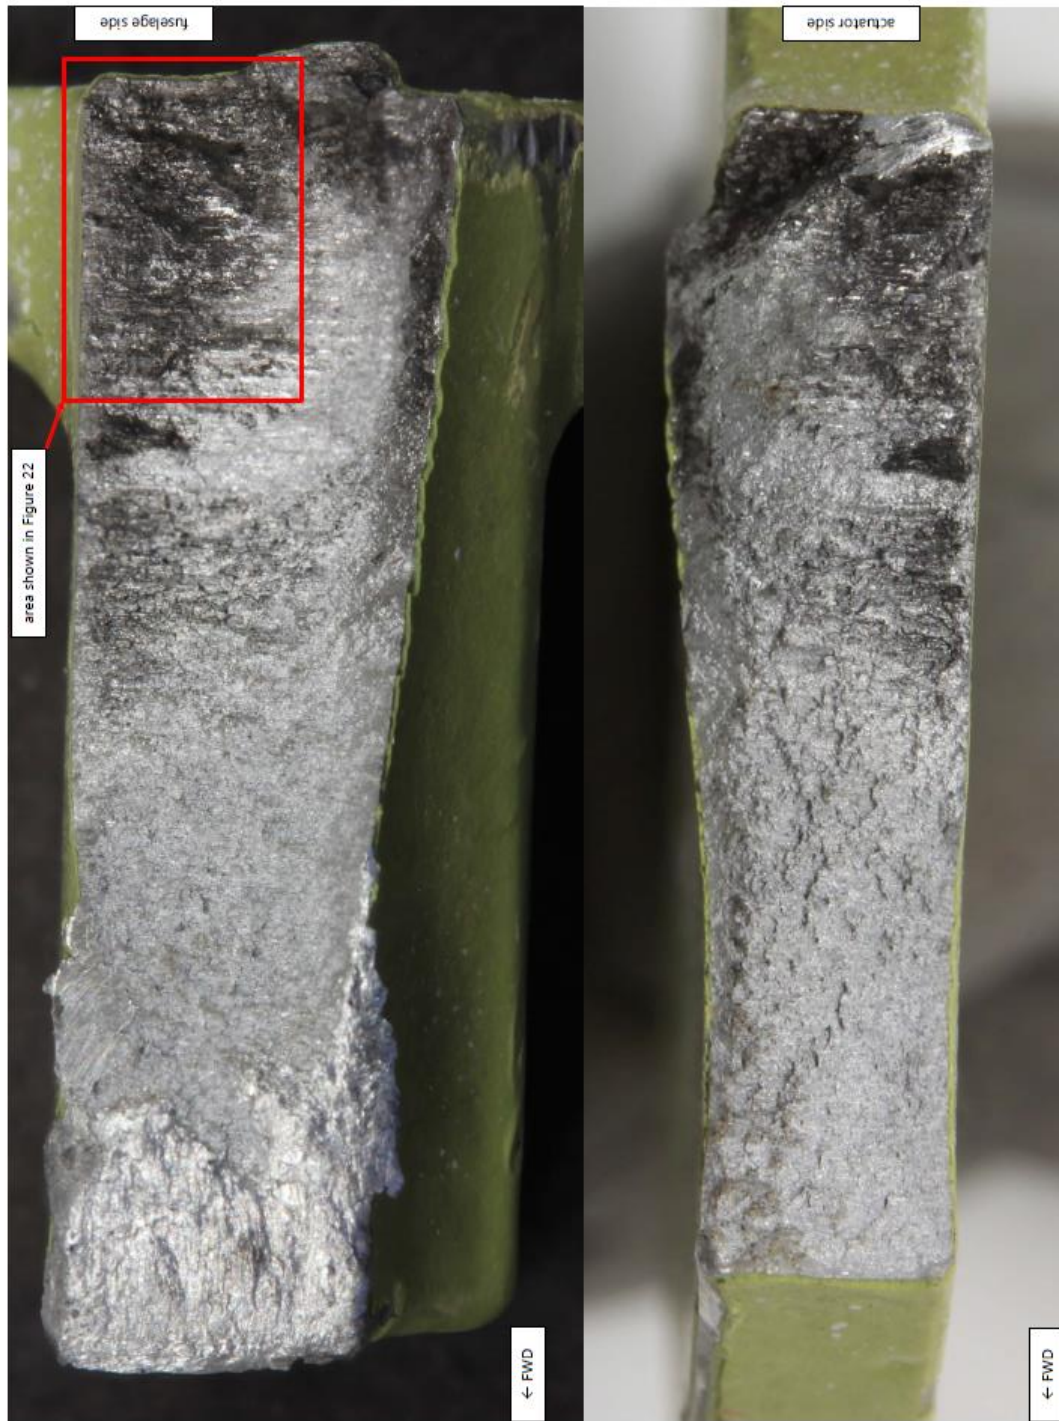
Condition of the cleaned fuselage and actuator sided LH fracture surfaces in cleaned condition
